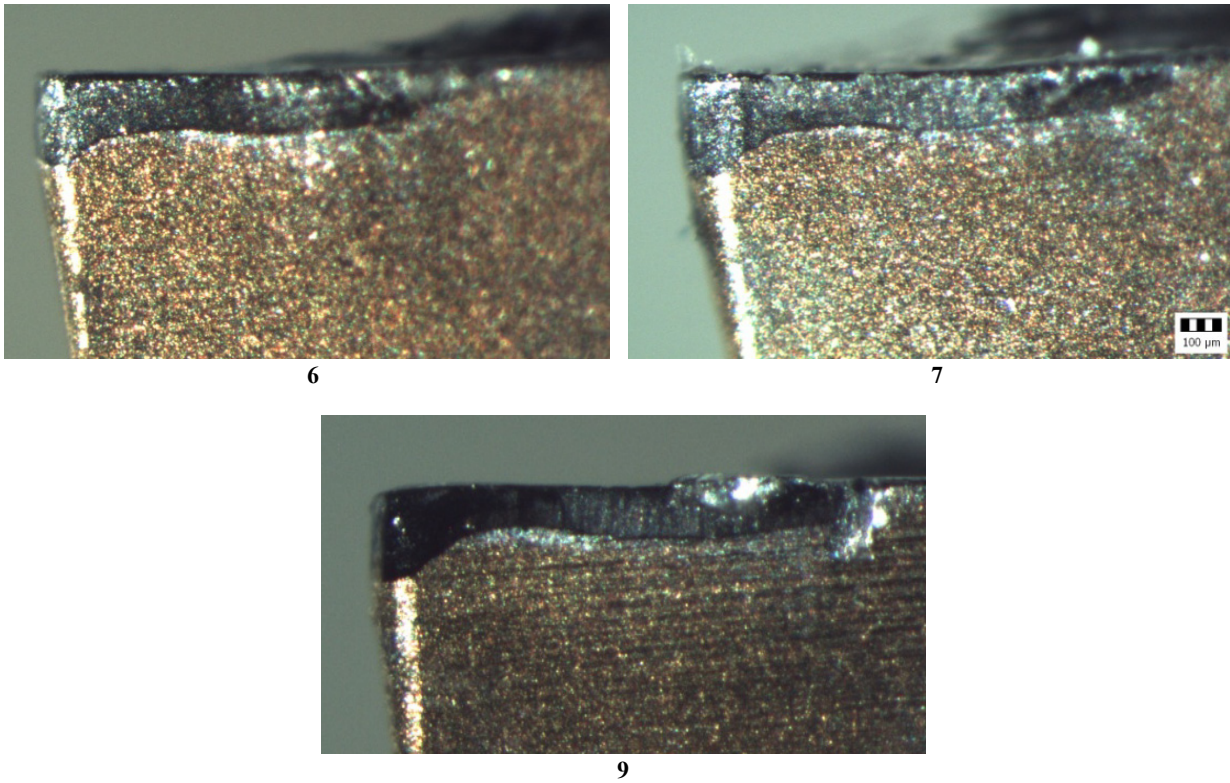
Cutting plates after machining of alloy samples with 0,2 % Ti (sample No. 6, 7, 9)
